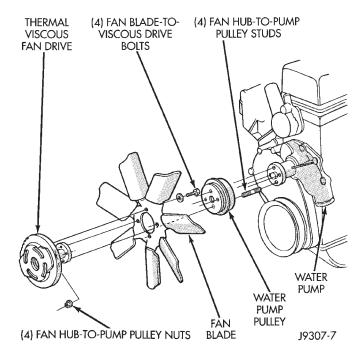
Fan Mounting Nuts-4.0L 6-Cyl. Engine
